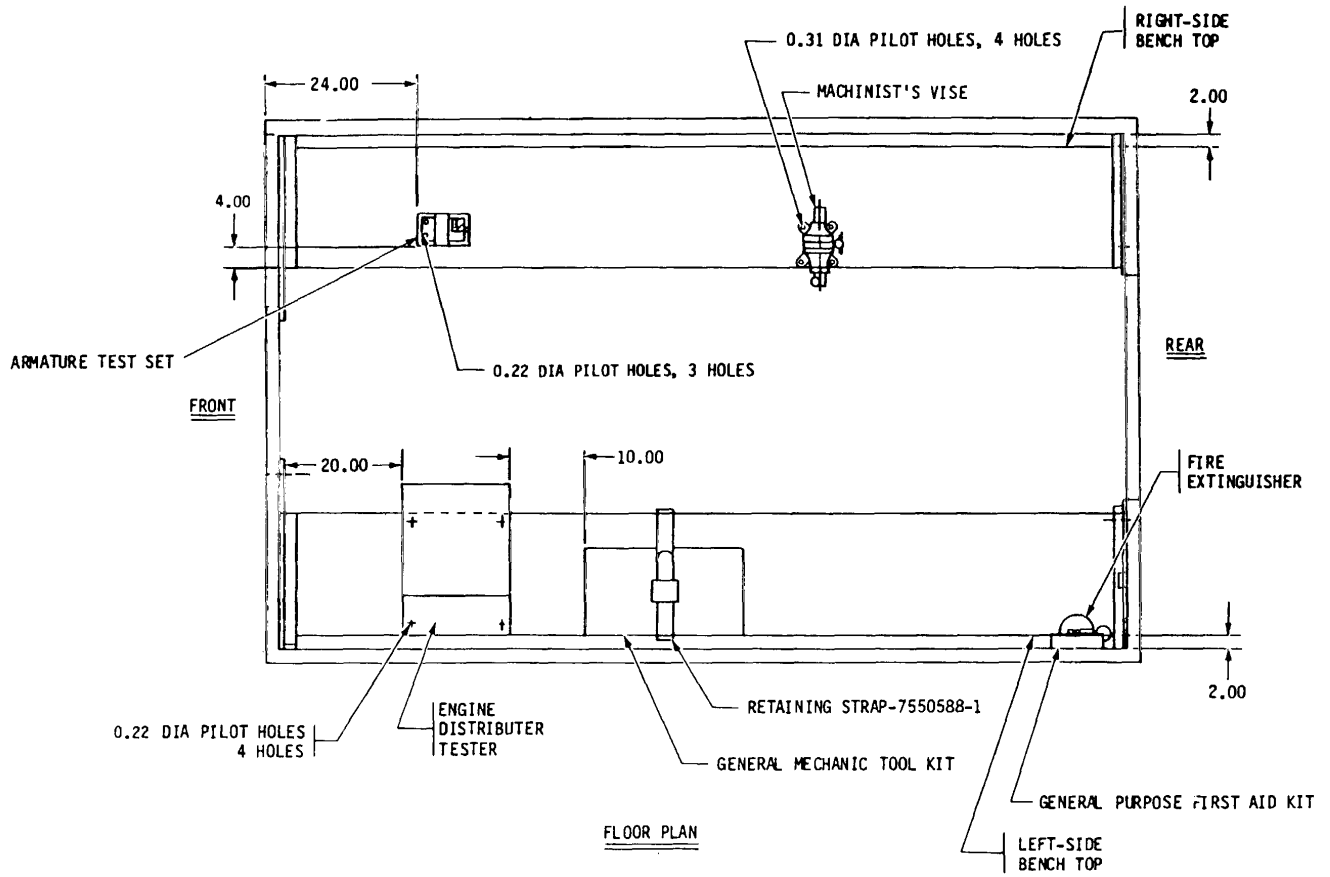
Components to be Mounted, Unit 1, 280, Floor Plan.
